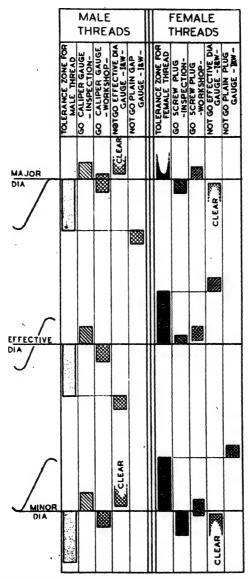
Thread Tolerance Gauging Diagram—B.S. Whitworth Form Threads
